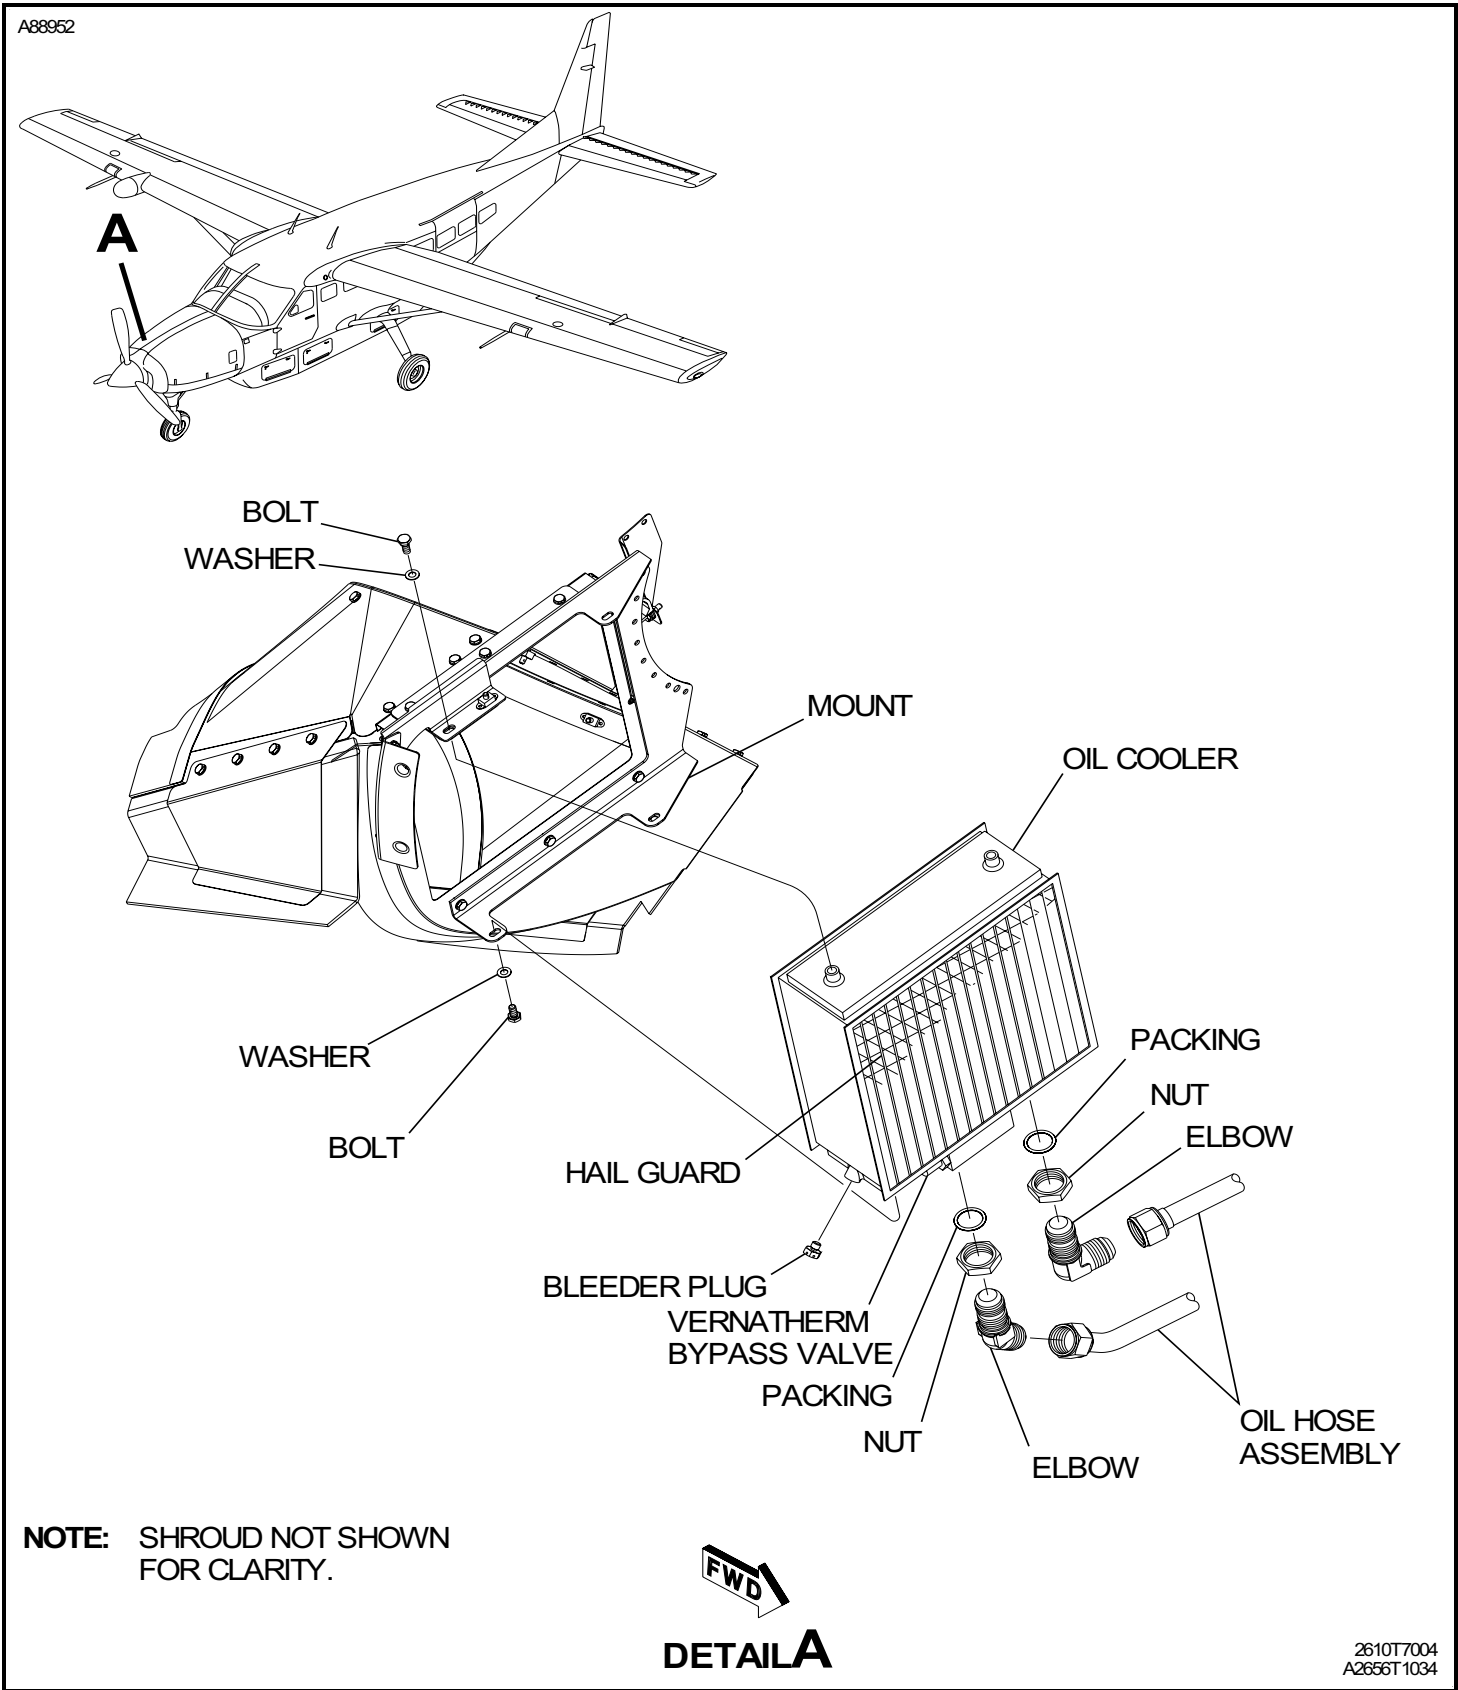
Sheet 1 : Oil Cooler Shroud Components Installation
